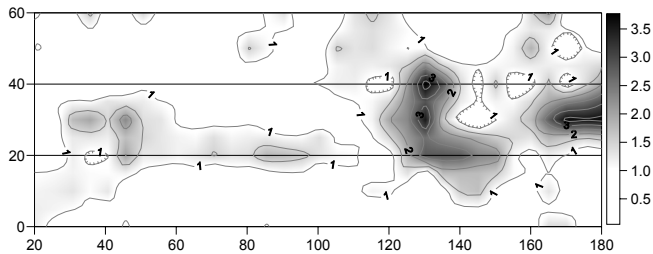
Magnetogram $m - H_{t,y}$ of joint A, indications: 30 ÷ 50 mm – SCZ coincides with the location of the occurrence of the defects of the weld seam; 120 ÷ 150 mm – SCZ partly coincides with the location of the occurrence of the defects of the weld seam, the area of the largest values of m are probably the place of arc reignition, which may also suggest the occurrence of imperfections 517 or 601 according to standard EN ISO 5817; 160 ÷ 180 mm – SCZ.
